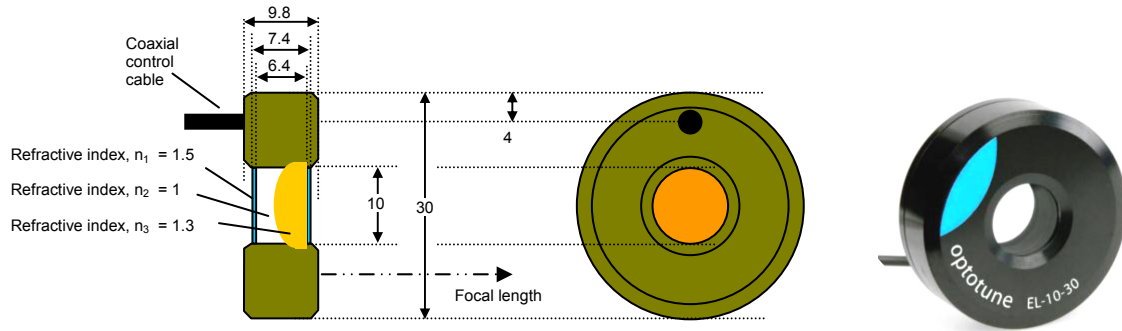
Mechanical details of the Optotune EL-10-30-LD lens assembly.
